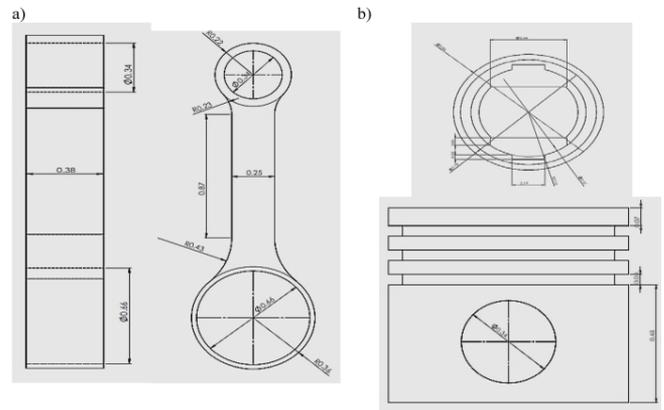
a) Top and right profiles of the connecting rod; and b) Top and front of the piston
